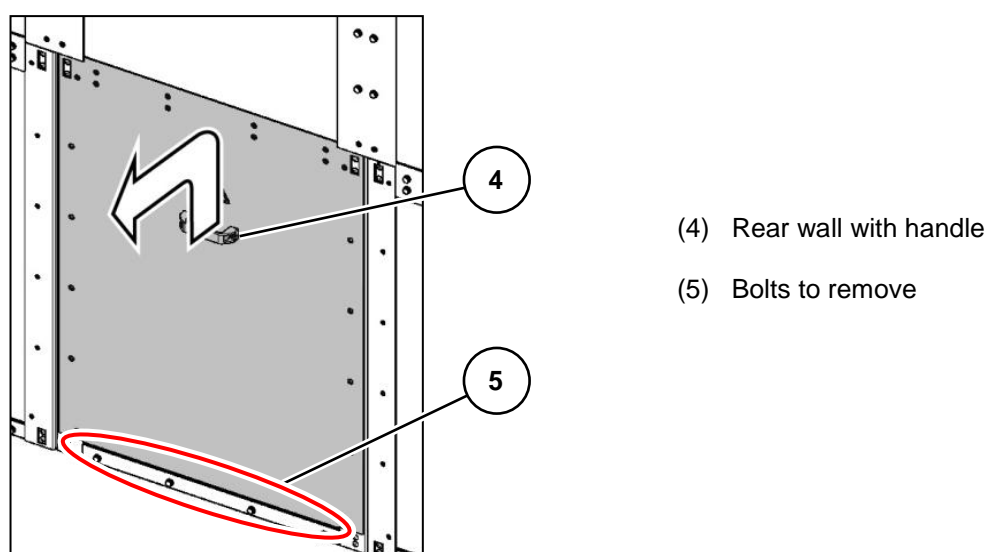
All panel versions except for contactor panels: removing the rear wall
